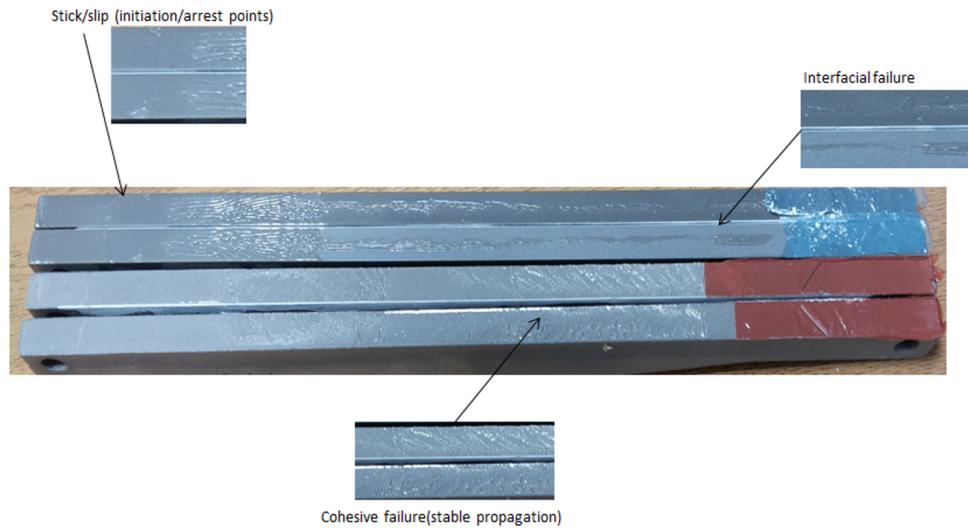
Fracture surfaces of silica modified TDCB specimens (crack propagation from right to left)
